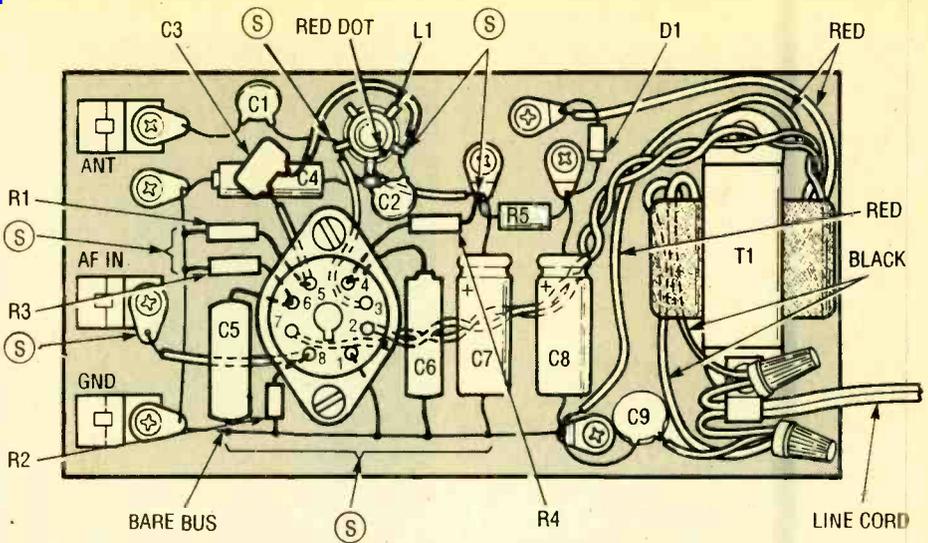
Mount the tube socket, using two 1 1/2-inch, #6 round-head wood screws. After that, make all of the connections shown here to complete the transmitter.
